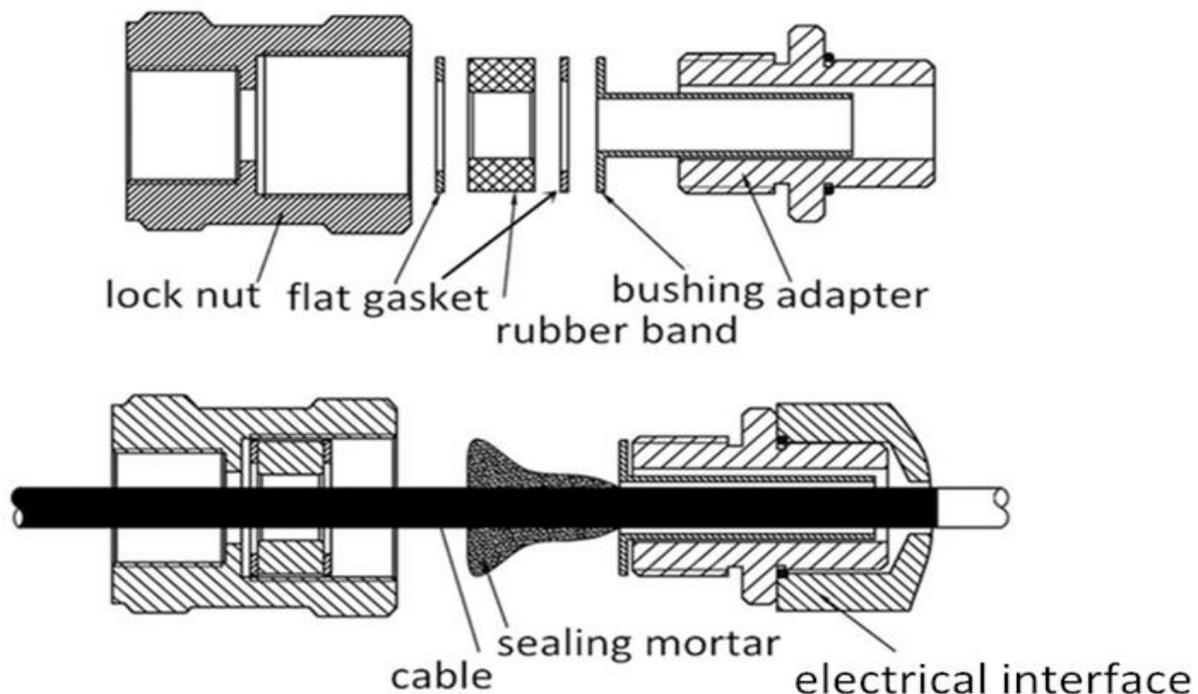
Installation of Explosion Proof Stuffing Box Joint
